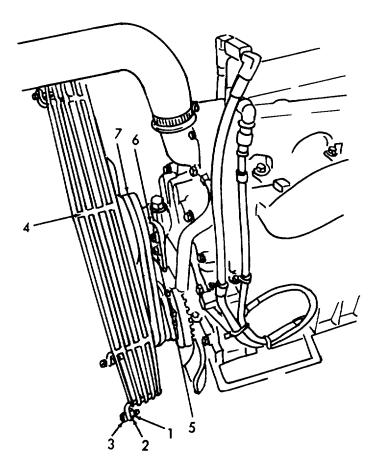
Fan Belts, Removal, Installation, and Adjustment.
